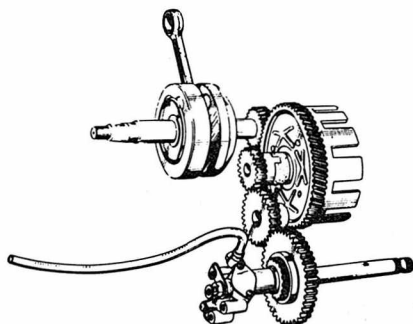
Different oil pump drives used on the Suzuki Savage. Oil pump on TS 250 R is located on left side of engine to the rear.
